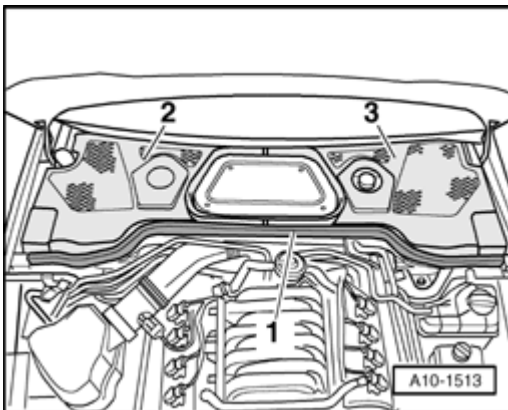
Identifying Rubber Seal & Plenum Chamber Covers
